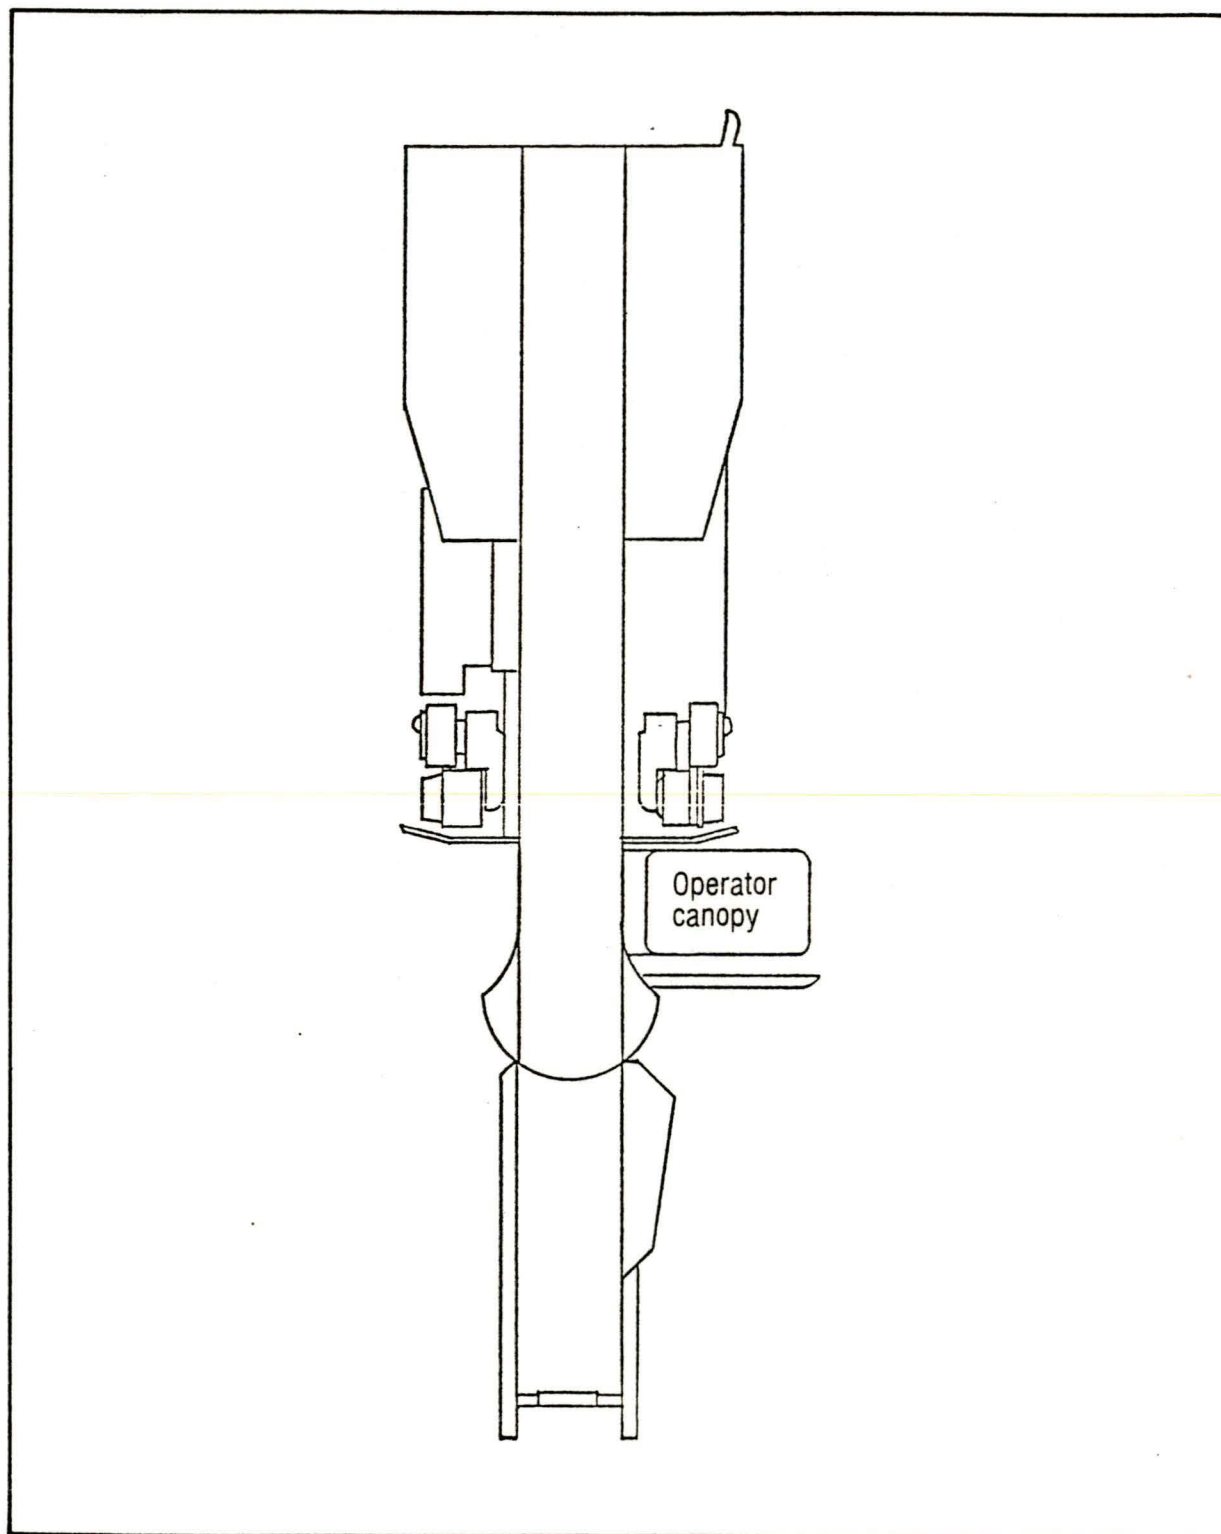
CONCEPT 3 -- MODIFIED JOY 14BU10-11B LOADER WITH CANOPY AND BUMPER MOUNTED ON EXTENDED CONVEYOR BOOM
